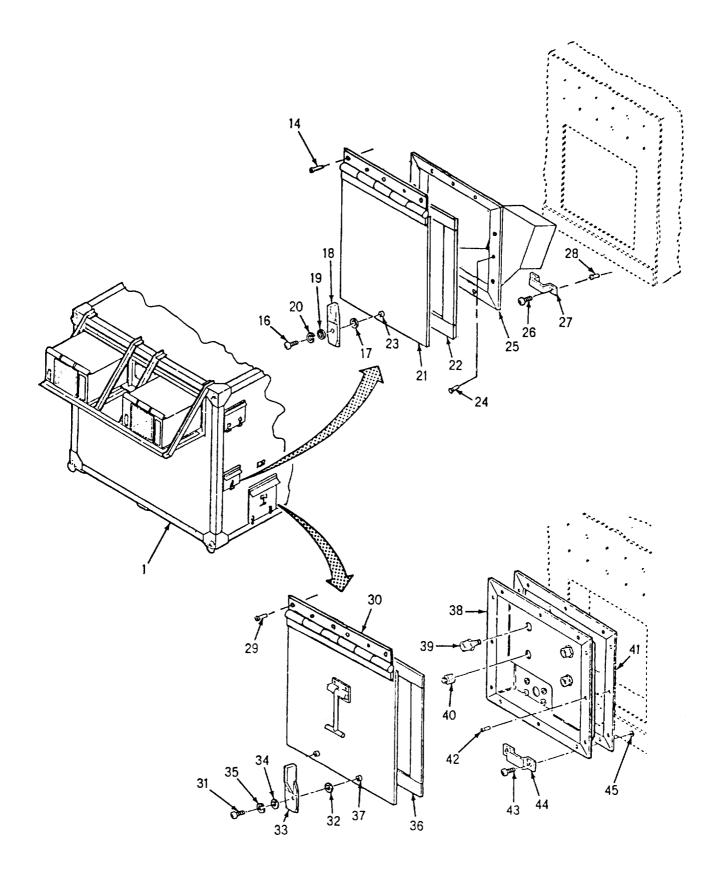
Shelter Assembly (Sheet 2 of 2)
